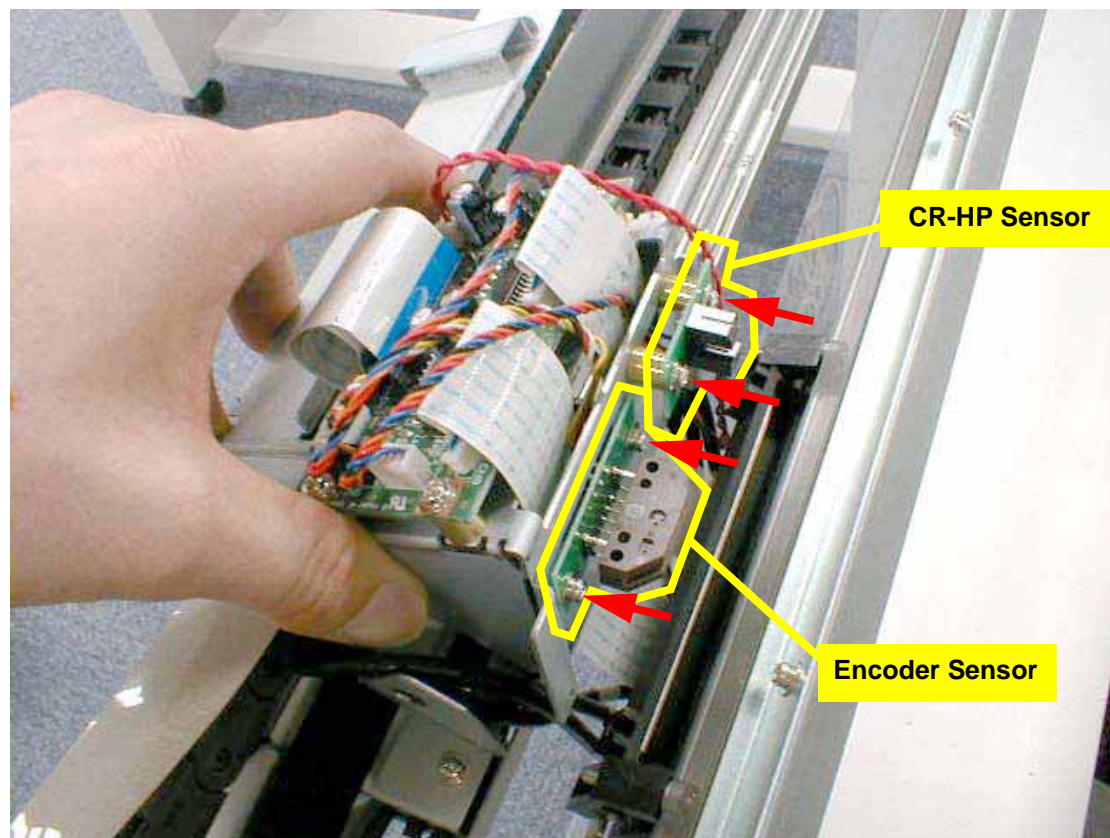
Removing the CR-HP sensor / Encoder sensor
